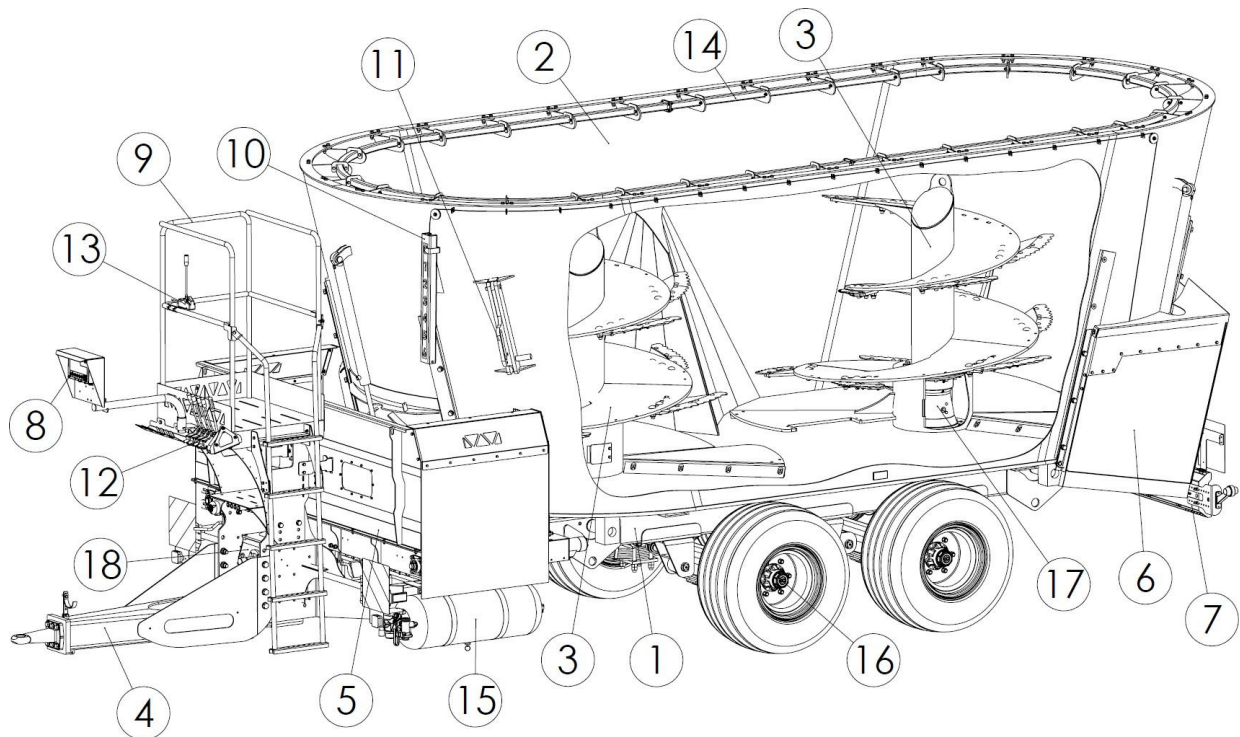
General design of the BEL-MIX T659/4 double-rotor feeder wagon: 1 - frame, 2 - tank, 3 - screw, 4 - drawbar, 5 - front conveyor, 6 - discharge, 7 - lights, 8 - balance, 9 - platform, 10 - gate opening indicator, 11 - counterblade, 12 - hydraulic system control levers, 13 - hydraulic counterblade control lever, 14 - limiting ring, 15 - air tank, 16 - tandem suspension, 17 - planetary gear, 18 - two-speed gear
